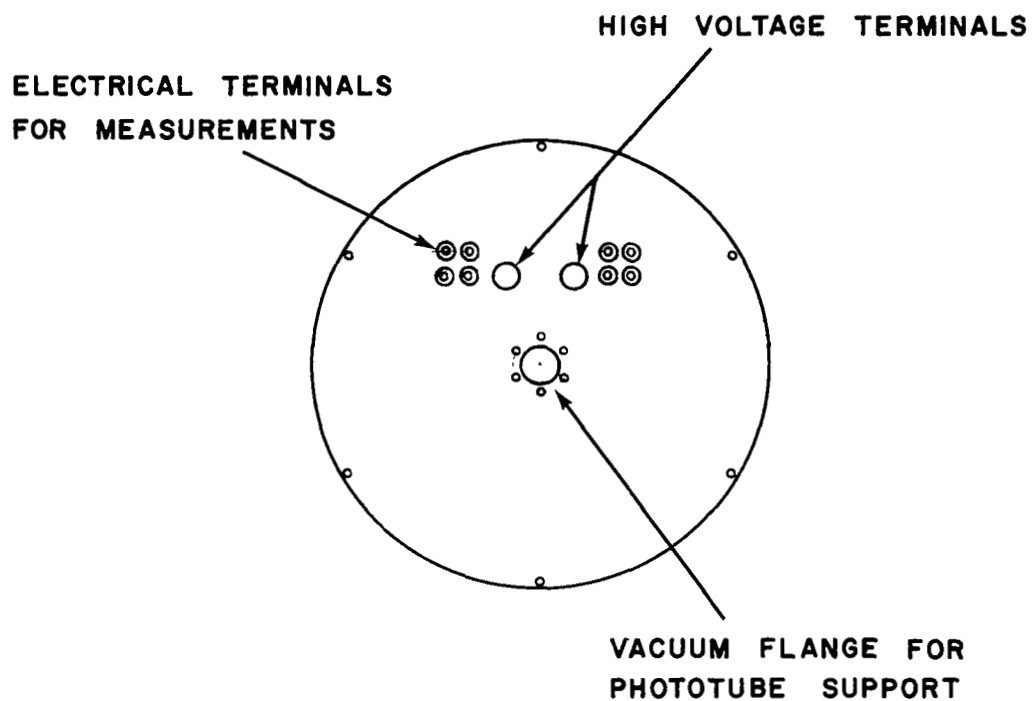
TOP CLOSURE PLATE ASSEMBLY
